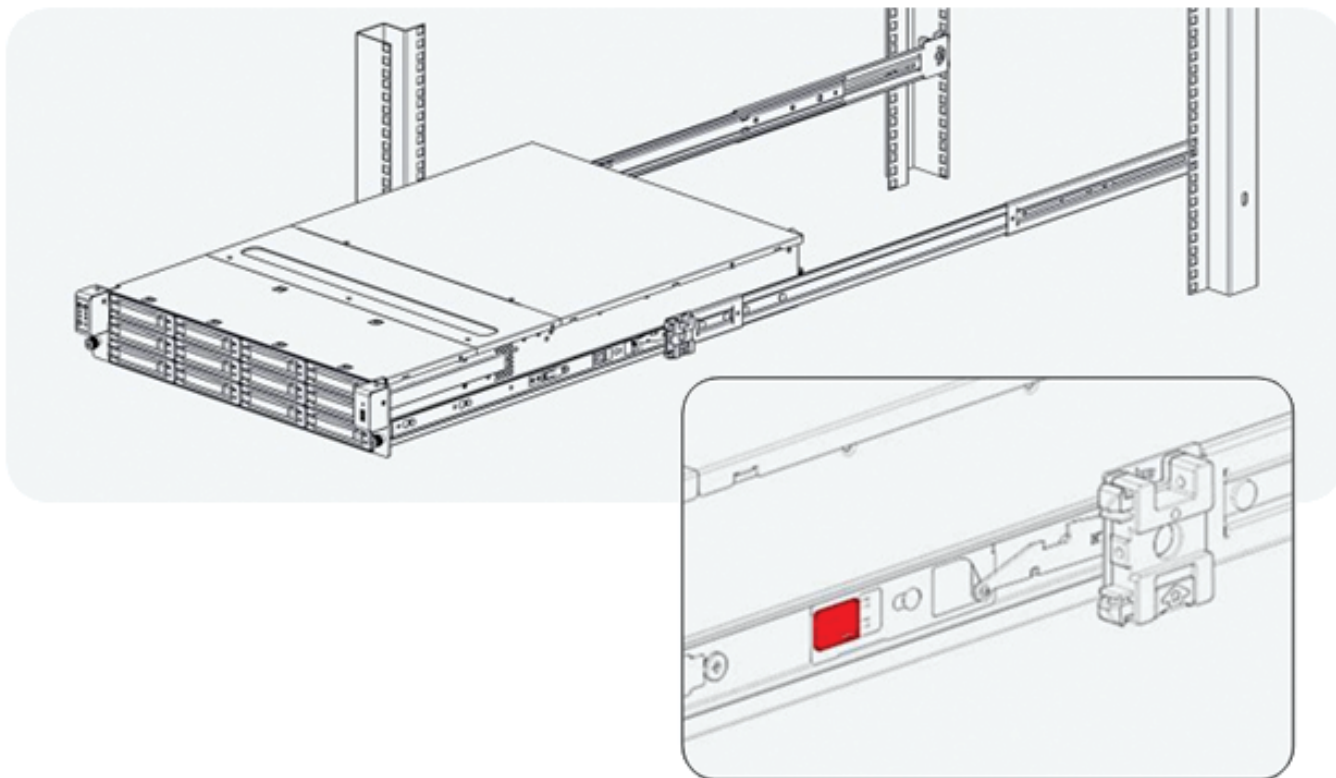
Push Array into Rack and Release Pin-lock Latches
